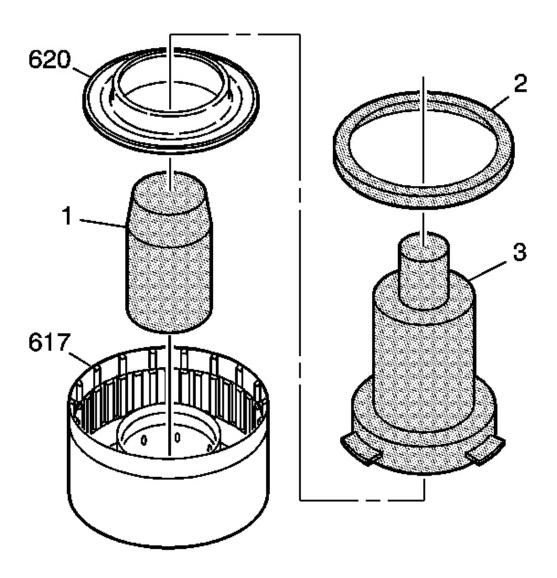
Installing Second Clutch Piston Courtesy of GENERAL MOTORS CORP.
